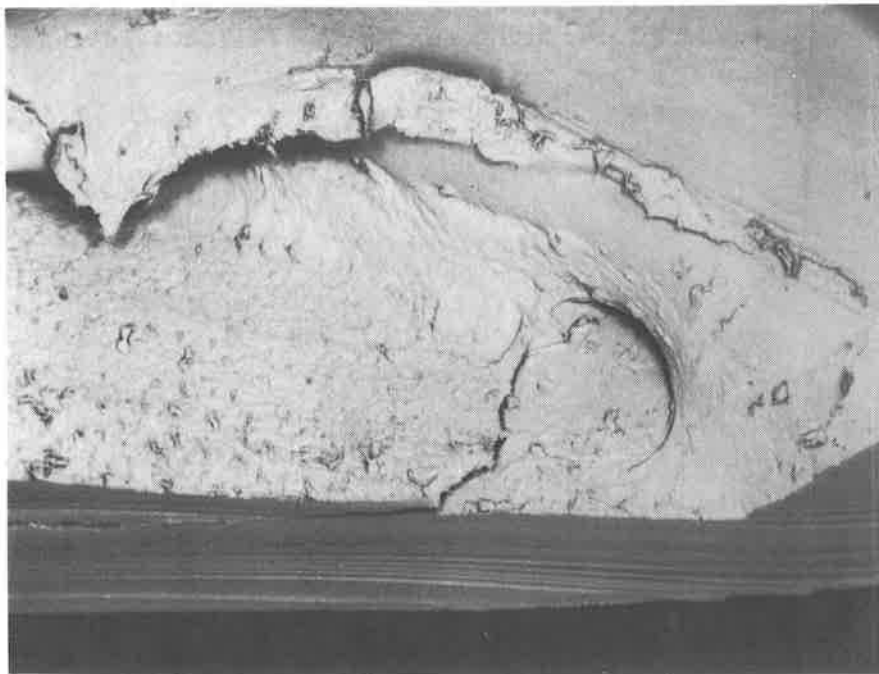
SEM VIEW OF EXTRUSION FILLET WELD SHOWING INTERFACE OF TWO 60-MIL HDPE LINERS
